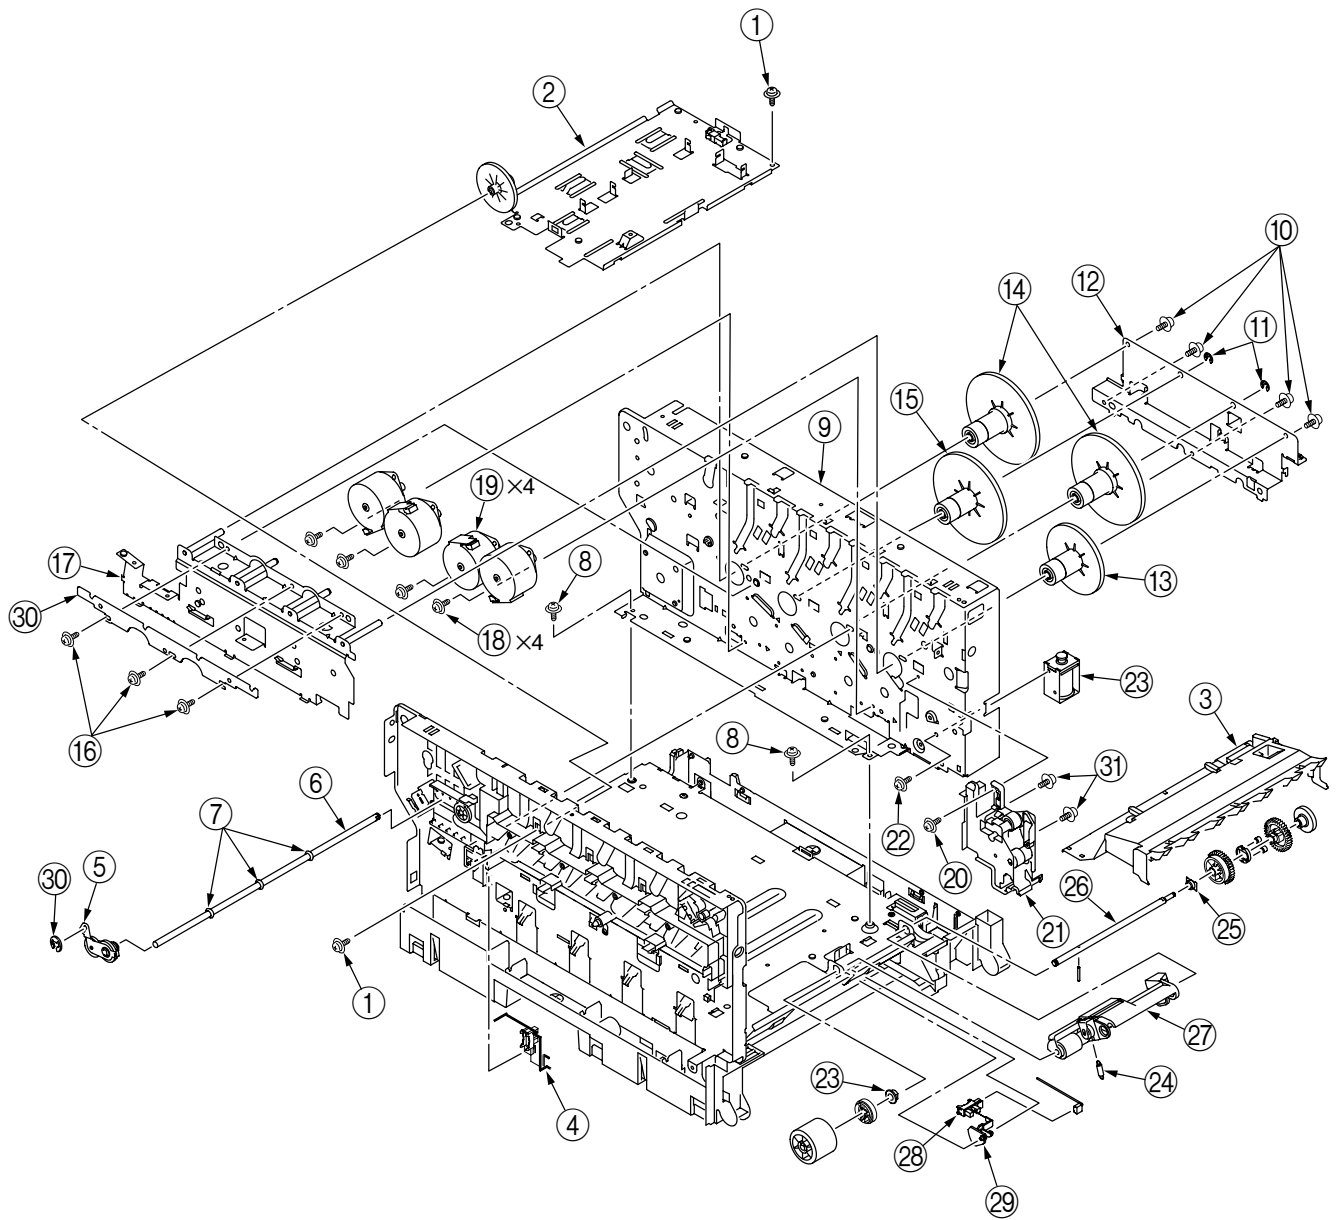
Main Motors / Solenoid / Paper-End Sensor
